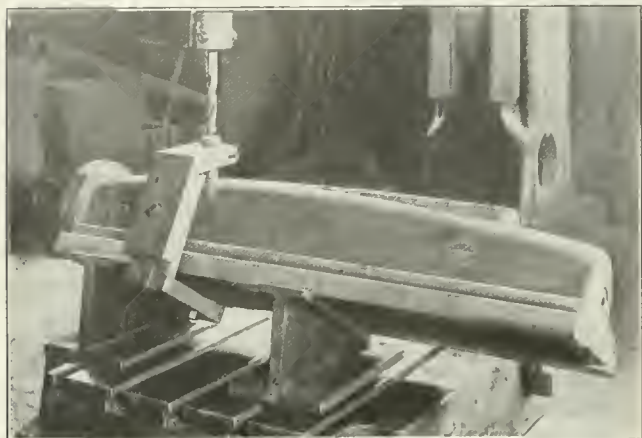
Drilling the Holes for the Ram-adjusting Shaft in a Feedick Radial Drill Preee
